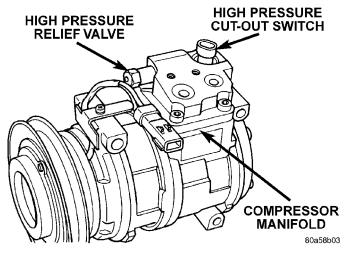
High Pressure Relief Valve Location HIGH PRESSURE RELIEF VALVE
